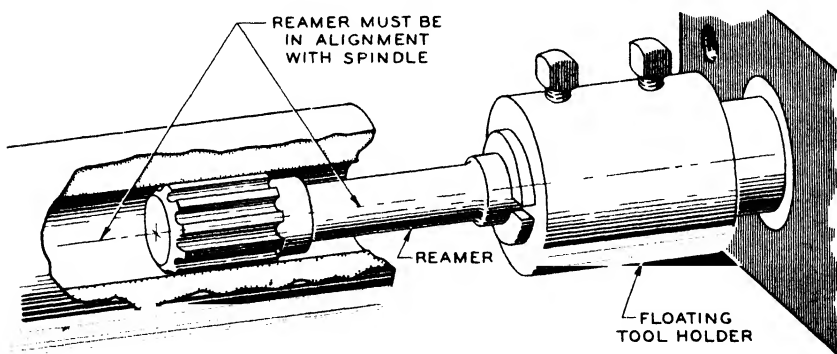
Illustrating How a Well-Designed, Floating Reamer Works in a Turret Lathe Operation
